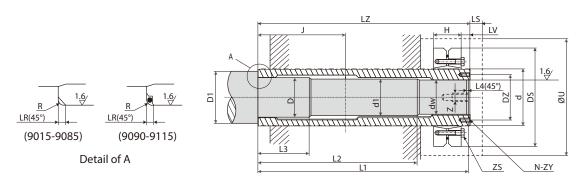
Diameters Relating Hollow Shaft, Driven shaft
